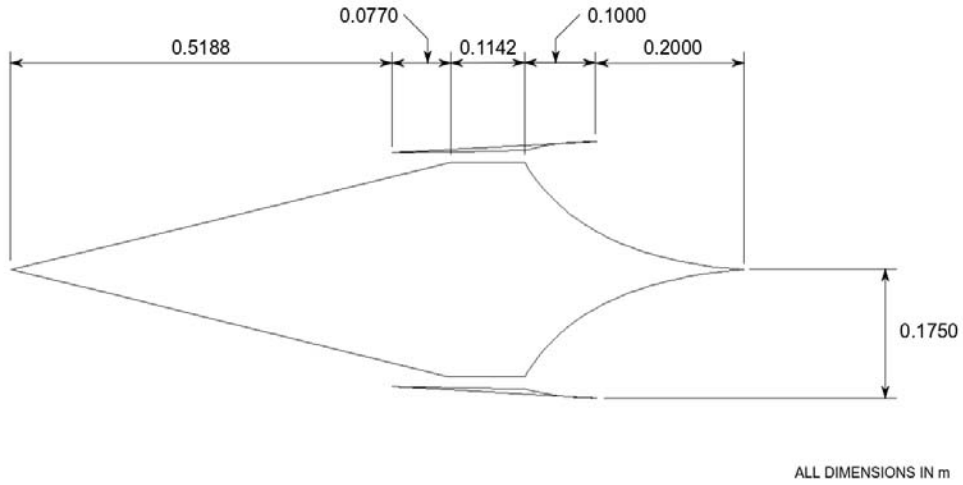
Technical CAD drawing of axis-symmetric inlet geometry.
